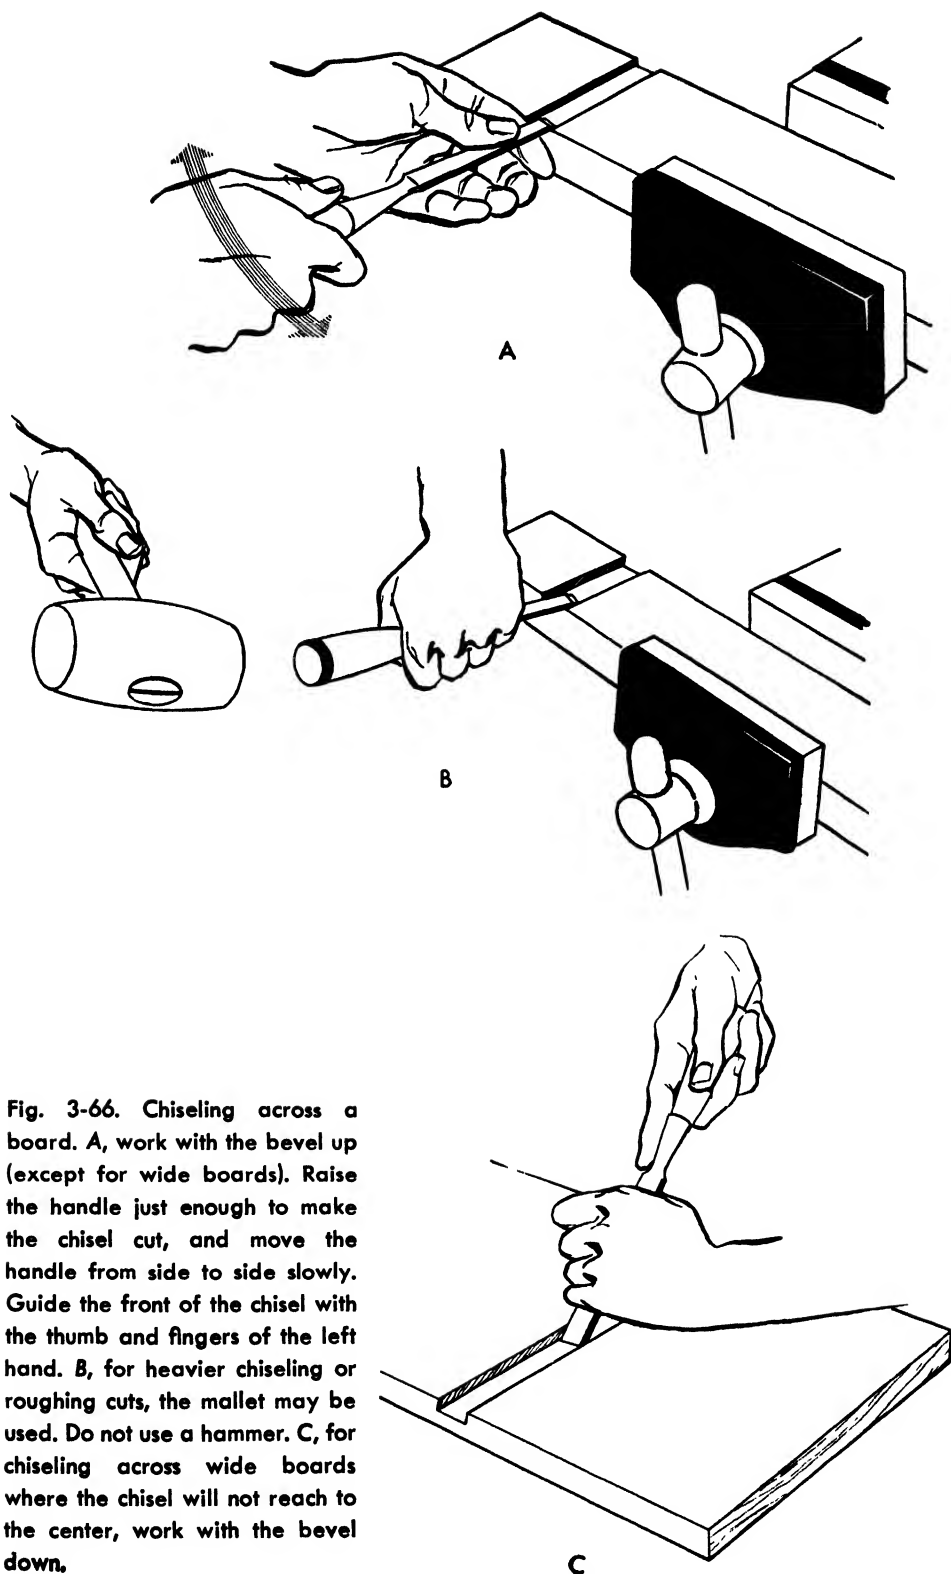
Chiseling across a board. A, work with the bevel up (except for wide boards). Raise the handle just enough to make the chisel cut, and move the handle from side to side slowly. Guide the front of the chisel with the thumb and fingers of the left hand. B, for heavier chiseling or roughing cuts, the mallet may be used. Do not use a hammer. C, for chiseling across wide boards where the chisel will not reach to the center, work with the bevel down.
